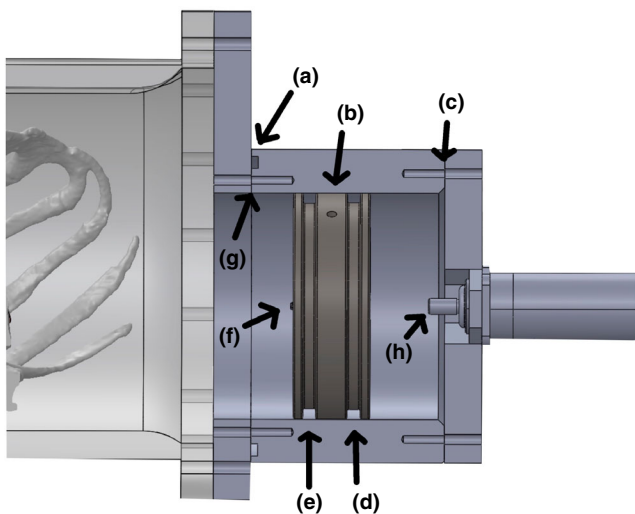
Cross-section of the piston drive mechanism. A: Cylinder face O-ring groove. B: Inter-O-ring vent hole. C: Actuator mounting plate screw holes. D: Backup O-ring groove. E: Main O-ring groove. F: Insert for mounting piston-lung motion-coupling cable. G: Cylinder to base plate mounting screw holes. H: The linear actuator screws directly into the piston (see H in Fig), leaving minimal clearance between the piston and the actuator mounting plate to maximize the stroke length of the piston.
